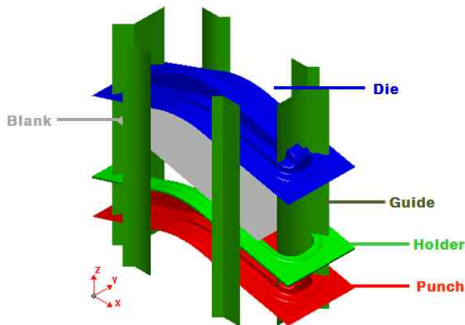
Finite element model of the tools and the blank for the stamping analysis of the target part
